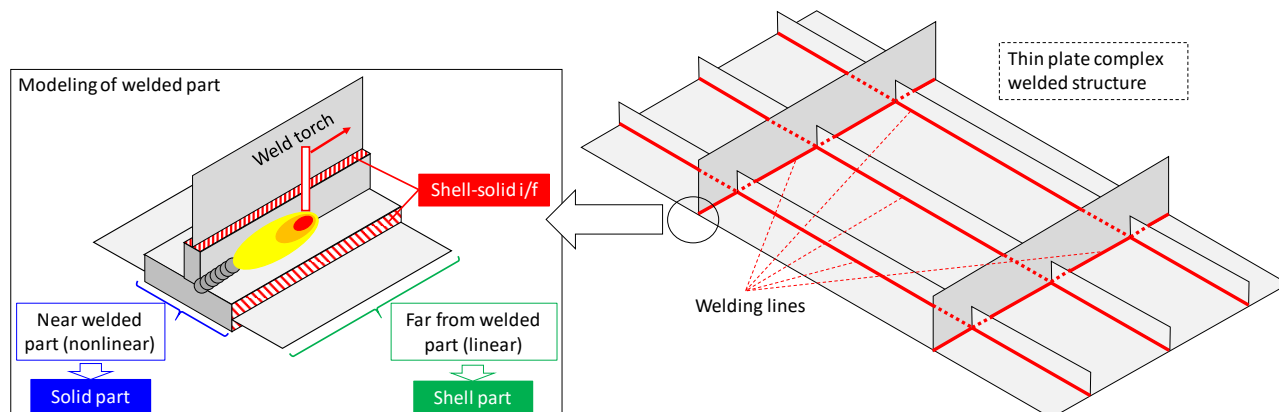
Concept of welding mechanics analysis based on shell-solid coupling.
